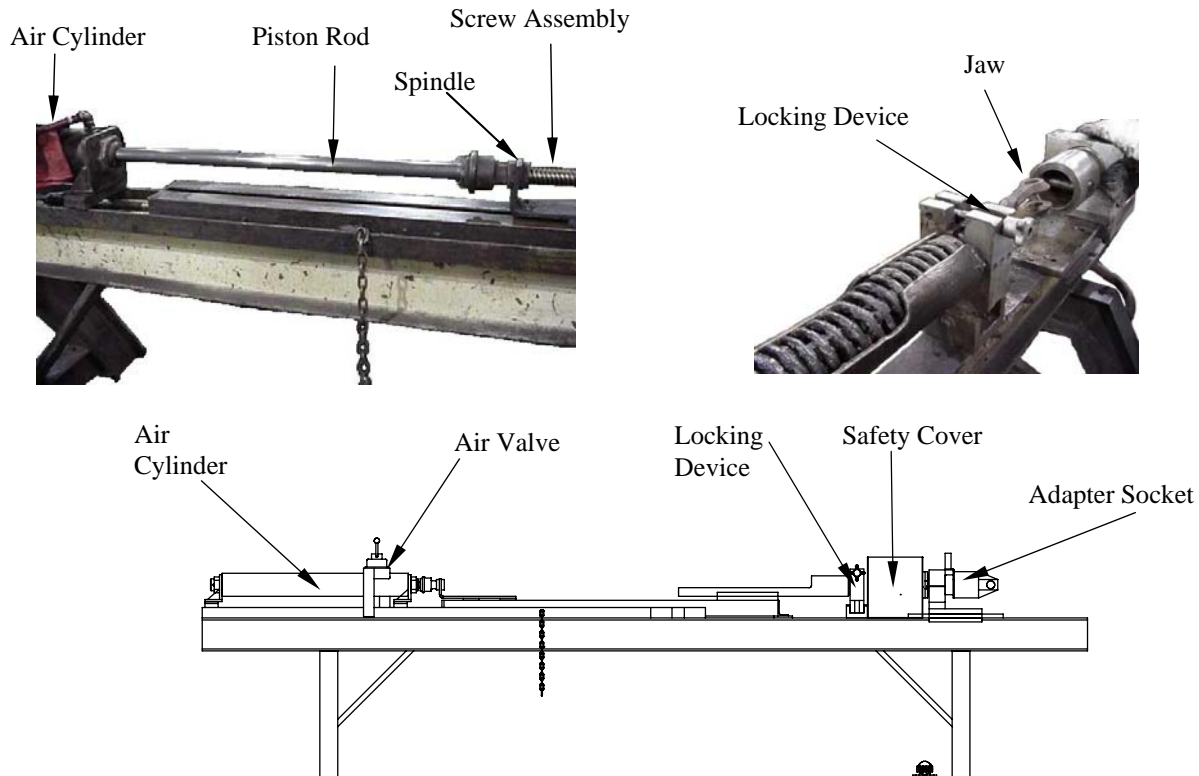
2000-DJ Slack Adjuster Spring Removal Fixture
